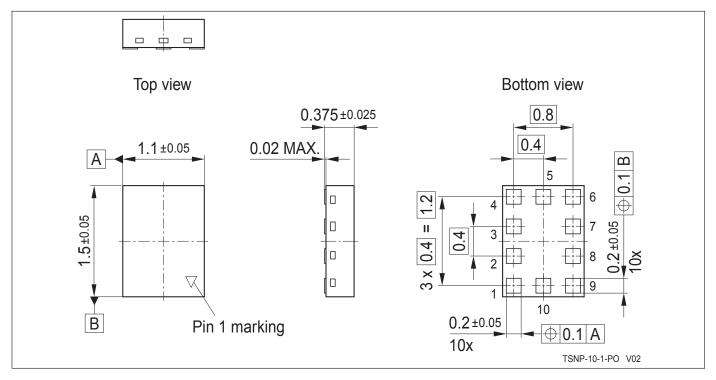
Package Dimensions Drawing (TSNP-10-1)
